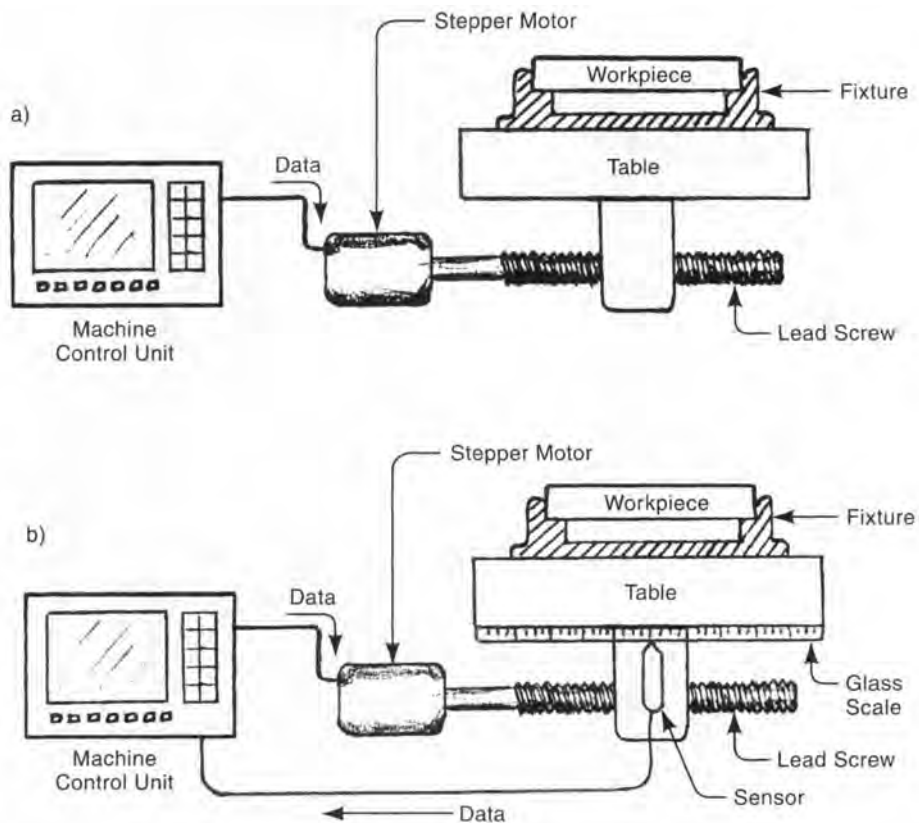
U-1 Open and closed loop control systems. An open-loop system in view a) shows data being transmitted to one of the machine tool's stepper motors causing it to move the machine table a stipulated amount. There is no feed back to verify the table's position. In view b) sensors detect the table's position with respect to a glass scale and this information is fed back to the machine control unit, which may send further signals to the stepper motor to adjust the position of the table. In some closed-loop systems, additional sensors may similarly transmit data of other conditions back to the machine control unit.
